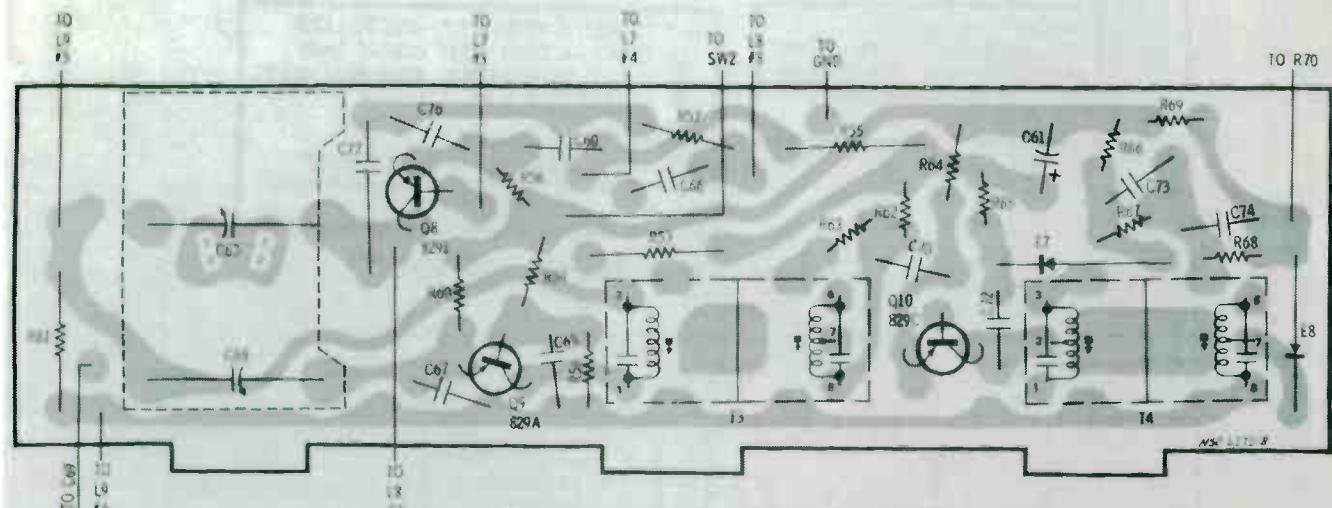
FM IF PLATED BOARD DIAGRAM (TOP VIEW - COMPONENT SIDE)
